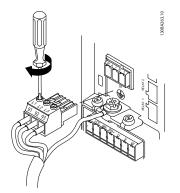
Mounting Line Power Plug and Tightening Wires
